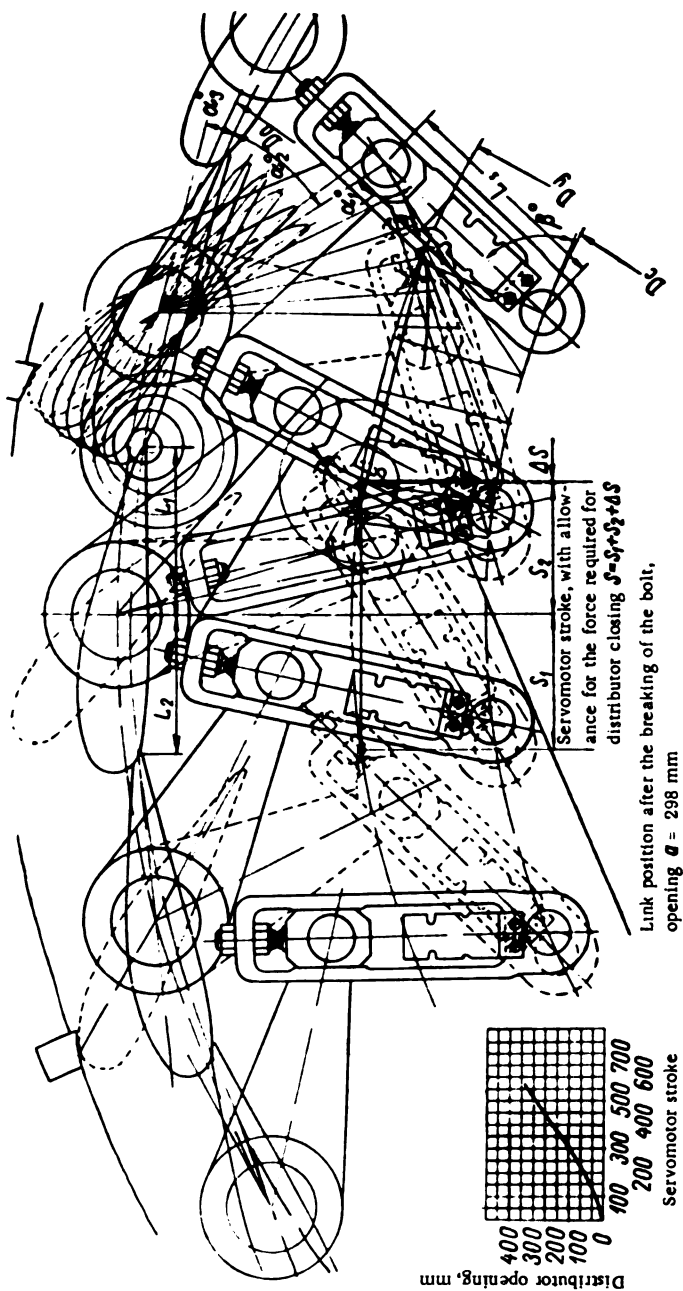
Graphical layout of the distributor, including actuating mechanism with a breaking bolt in the link
